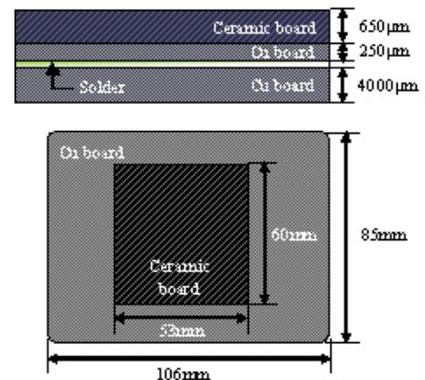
Schematics of the specimen after soldering. (a) The face (b) The cross-section
